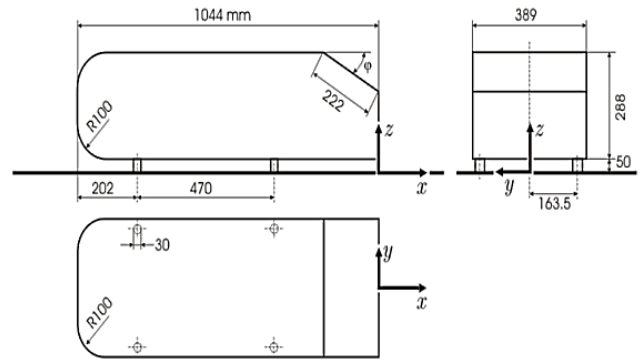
Side, rear and top views of Ahmed body (dimensions in mm) [3] [19]
